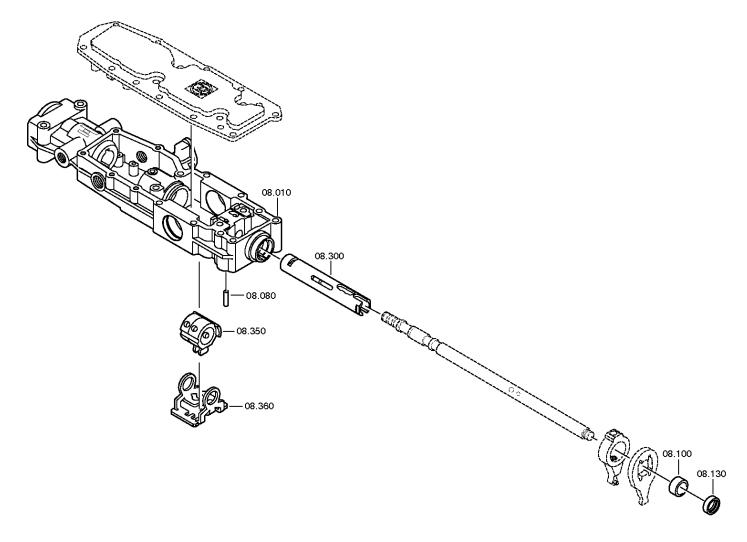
GEAR SHIFT HOUSING
